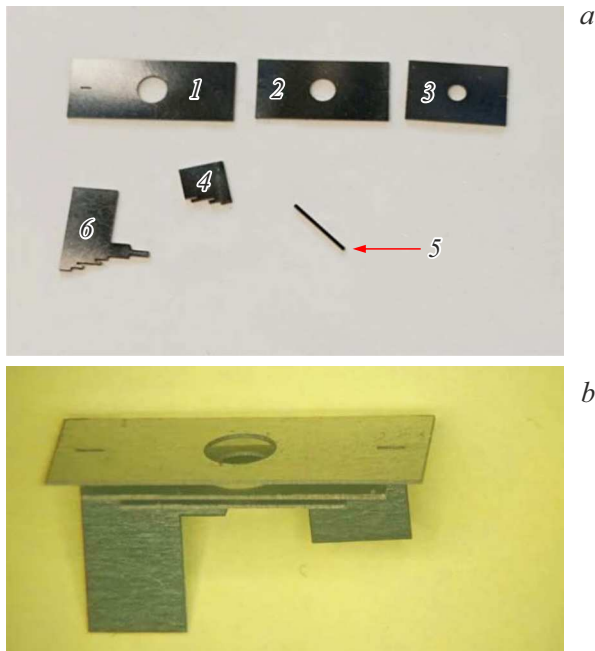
Photos of the fabricated electron gun components (a) and the focusing electrode assembly (b). 1–3 — focusing diaphragms, 4, 6 — mounting elements, 5 — heater foot.
